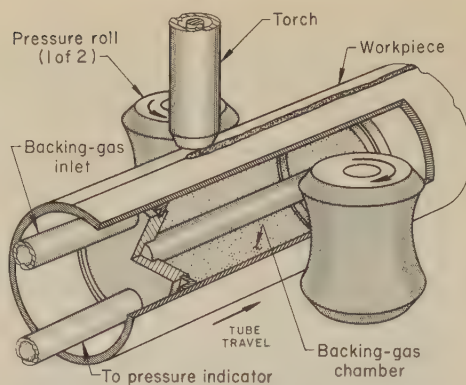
Setup for welding longitudinal seams in stainless steel tubes, employing internal backing with inert gas
